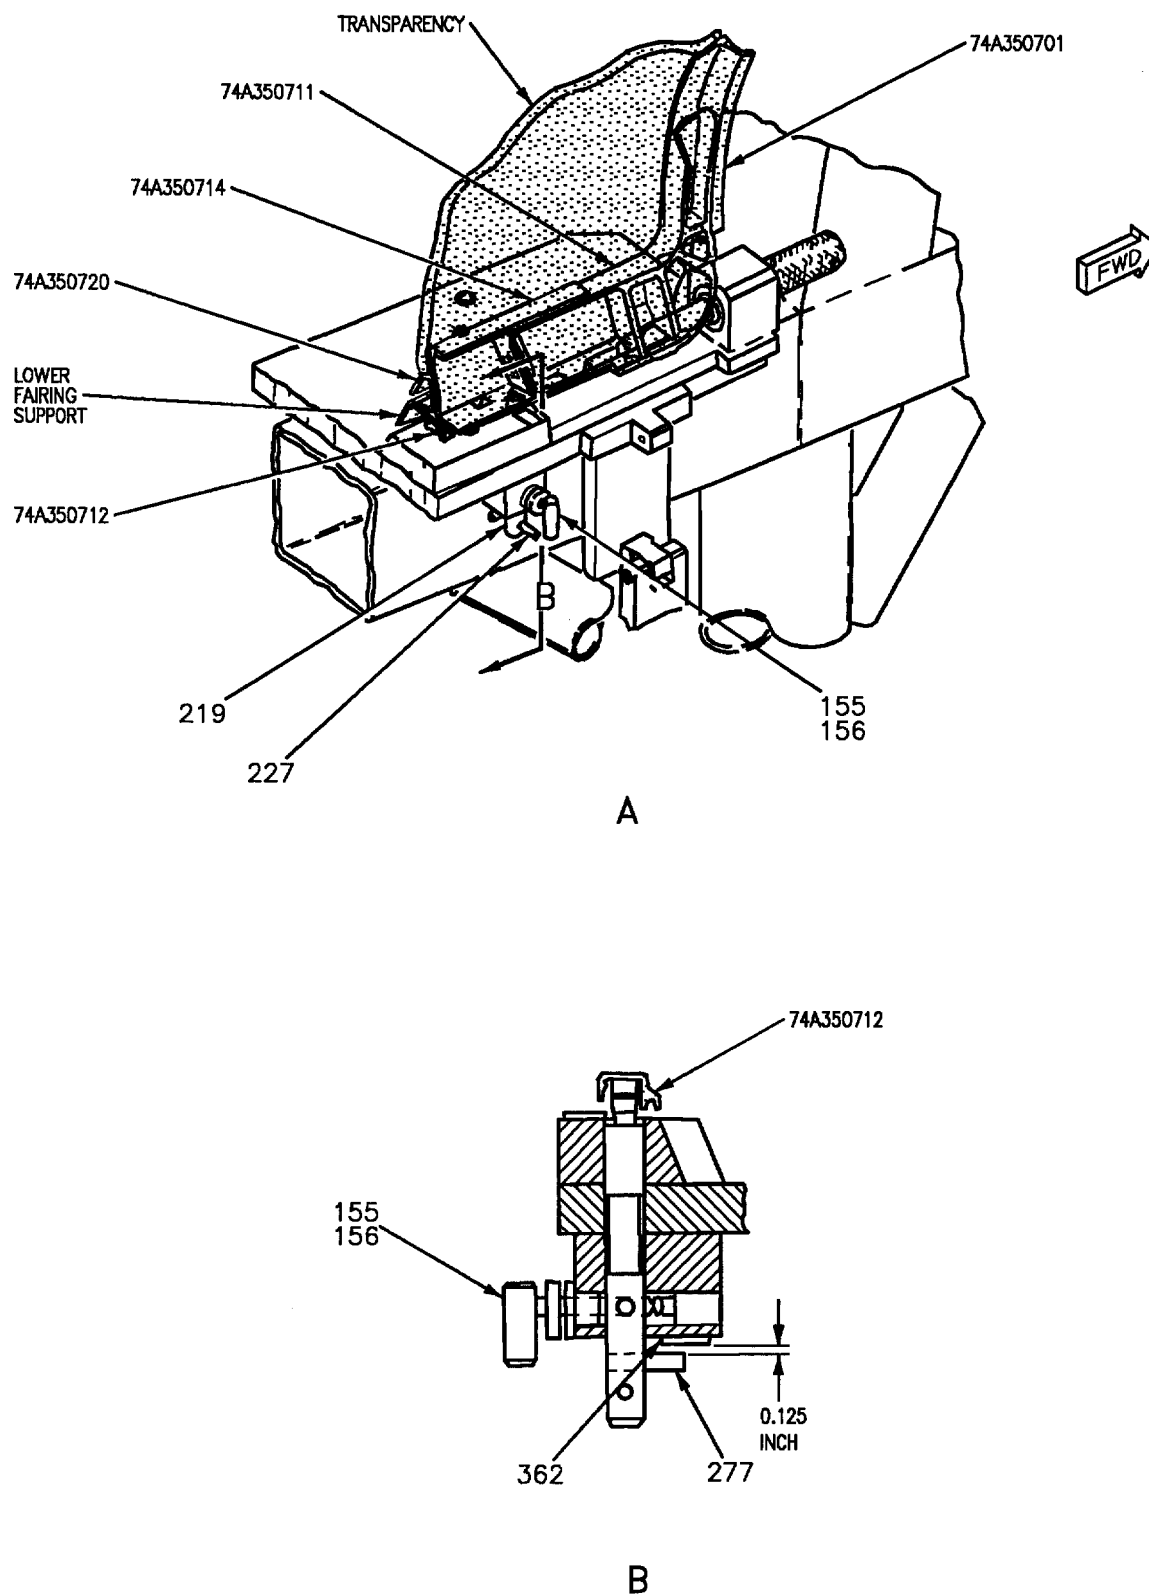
Inspection or Replacement - Lower Fairing Support (Sheet 2)
